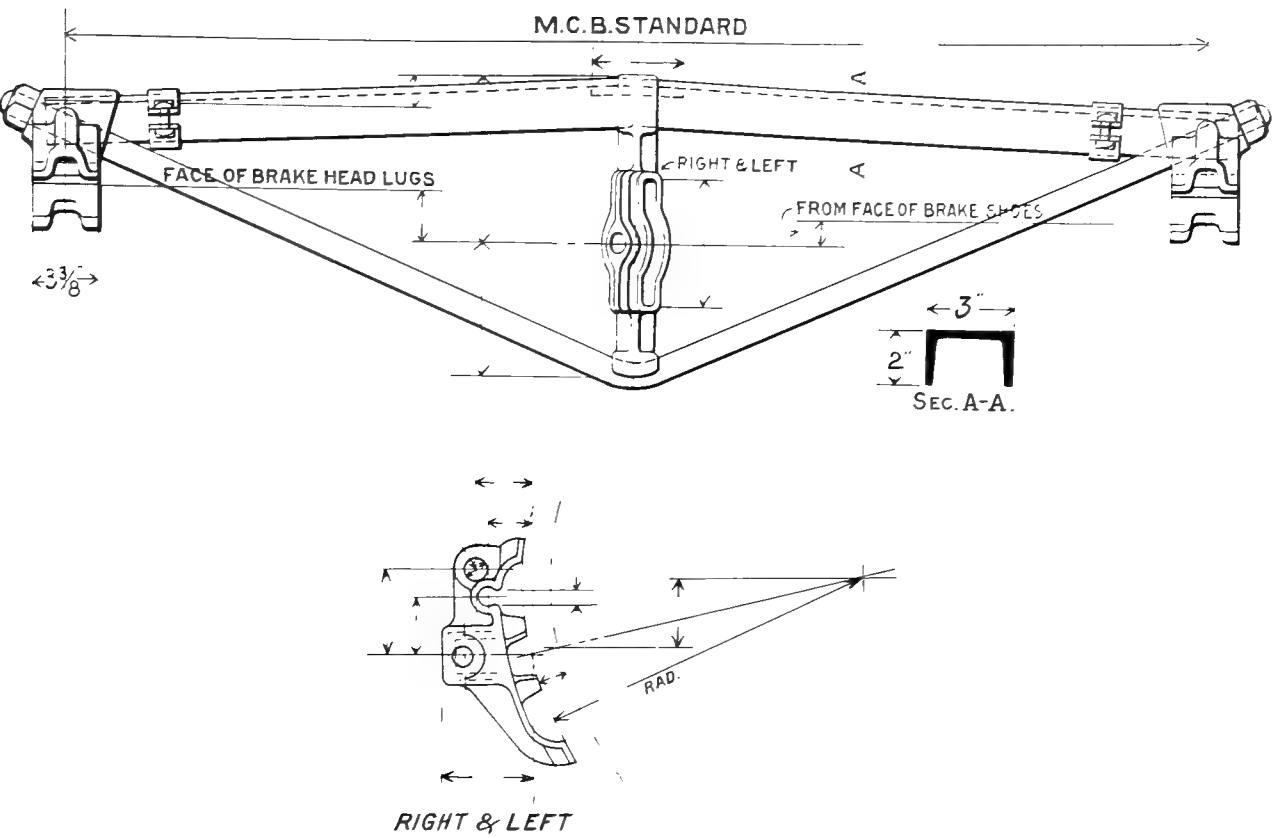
Pennsylvania Trussed Brake Beam, No. 1 and No. 2. Pennsylvania Brake Beam Company.
